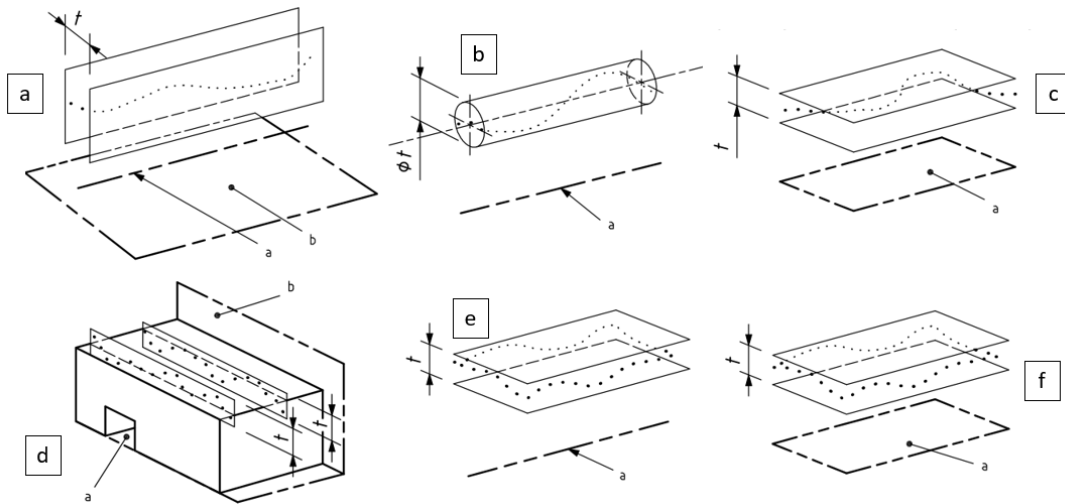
a) - Parallelism tolerance of a line related to a datum system; b) - Parallelism tolerance of a line related to a datum line; c) - Parallelism tolerance of a line related to a datum line; d) - Parallelism tolerance of a surface related to a datum plane; e) - Parallelism tolerance of a surface related to a datum line; f) - Parallelism tolerance of a surface related to a datum plane (extracted from [62])
